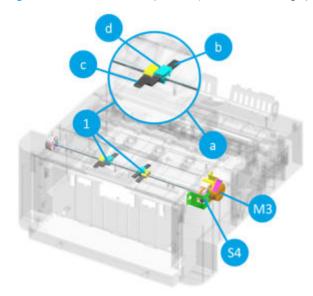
Inner finisher system - paddle unit driving system overview (sub paddle unit)
